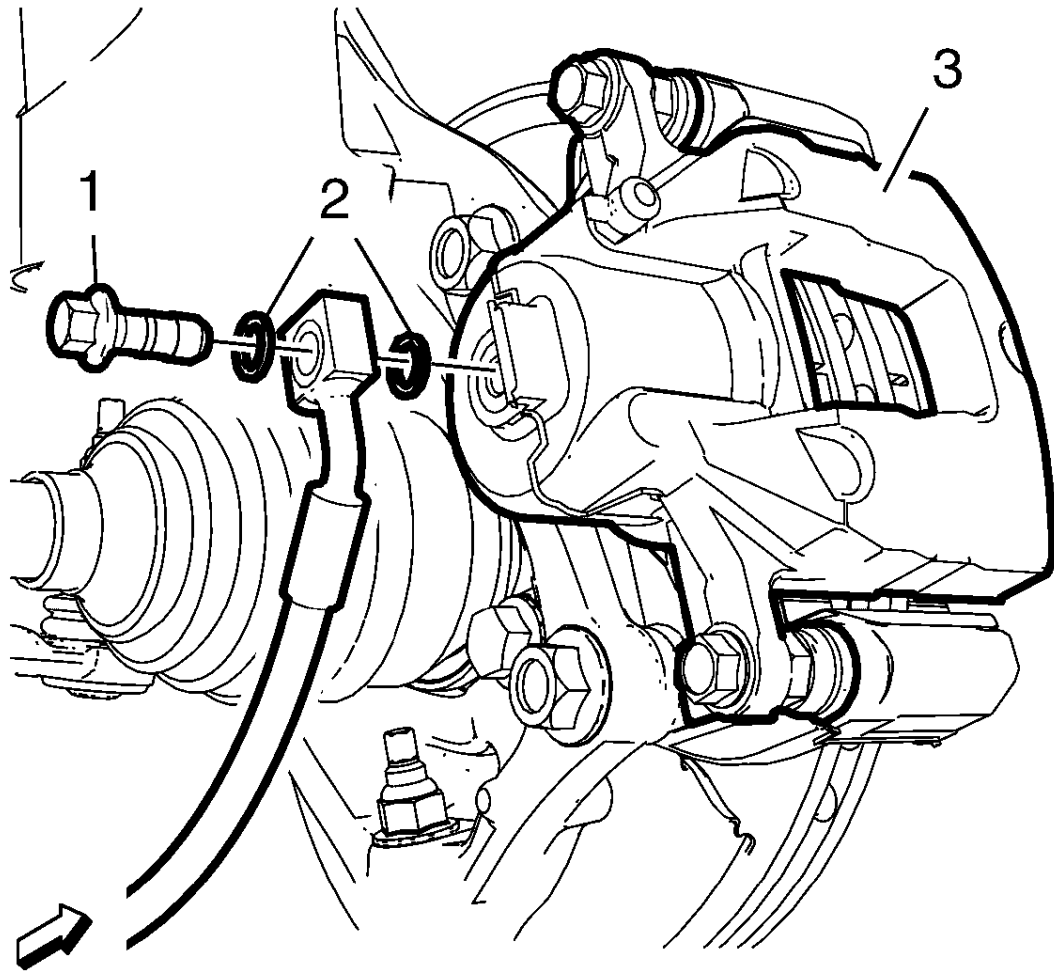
Brake Hose Fitting Bolt, Sealing Washers And Front Brake Caliper
